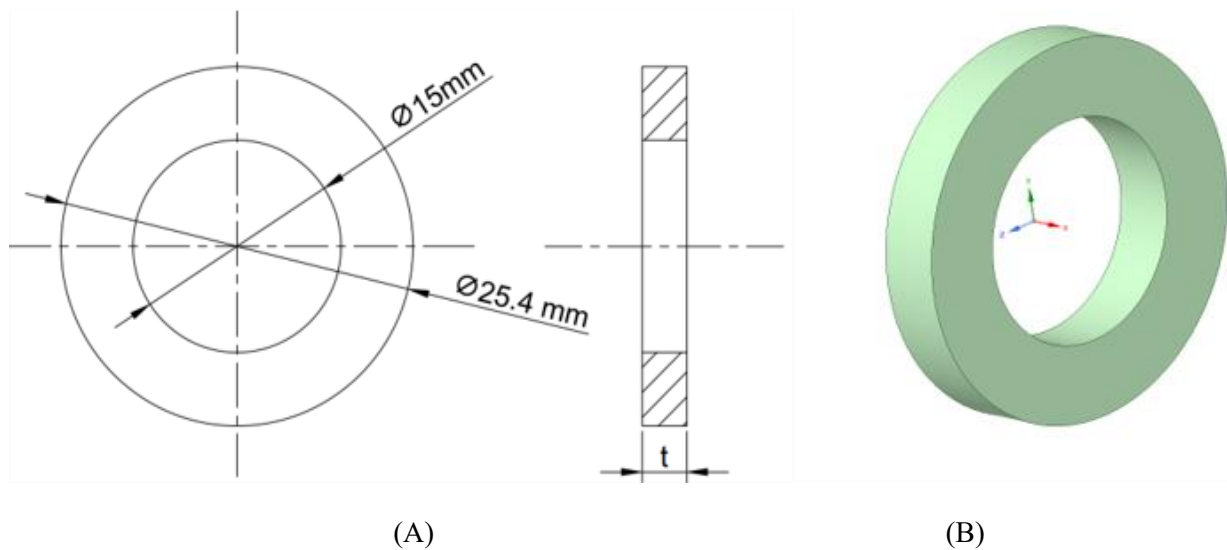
Orifice plate geometry model: (A) 2-D view with dimensions (B) 3-D view
